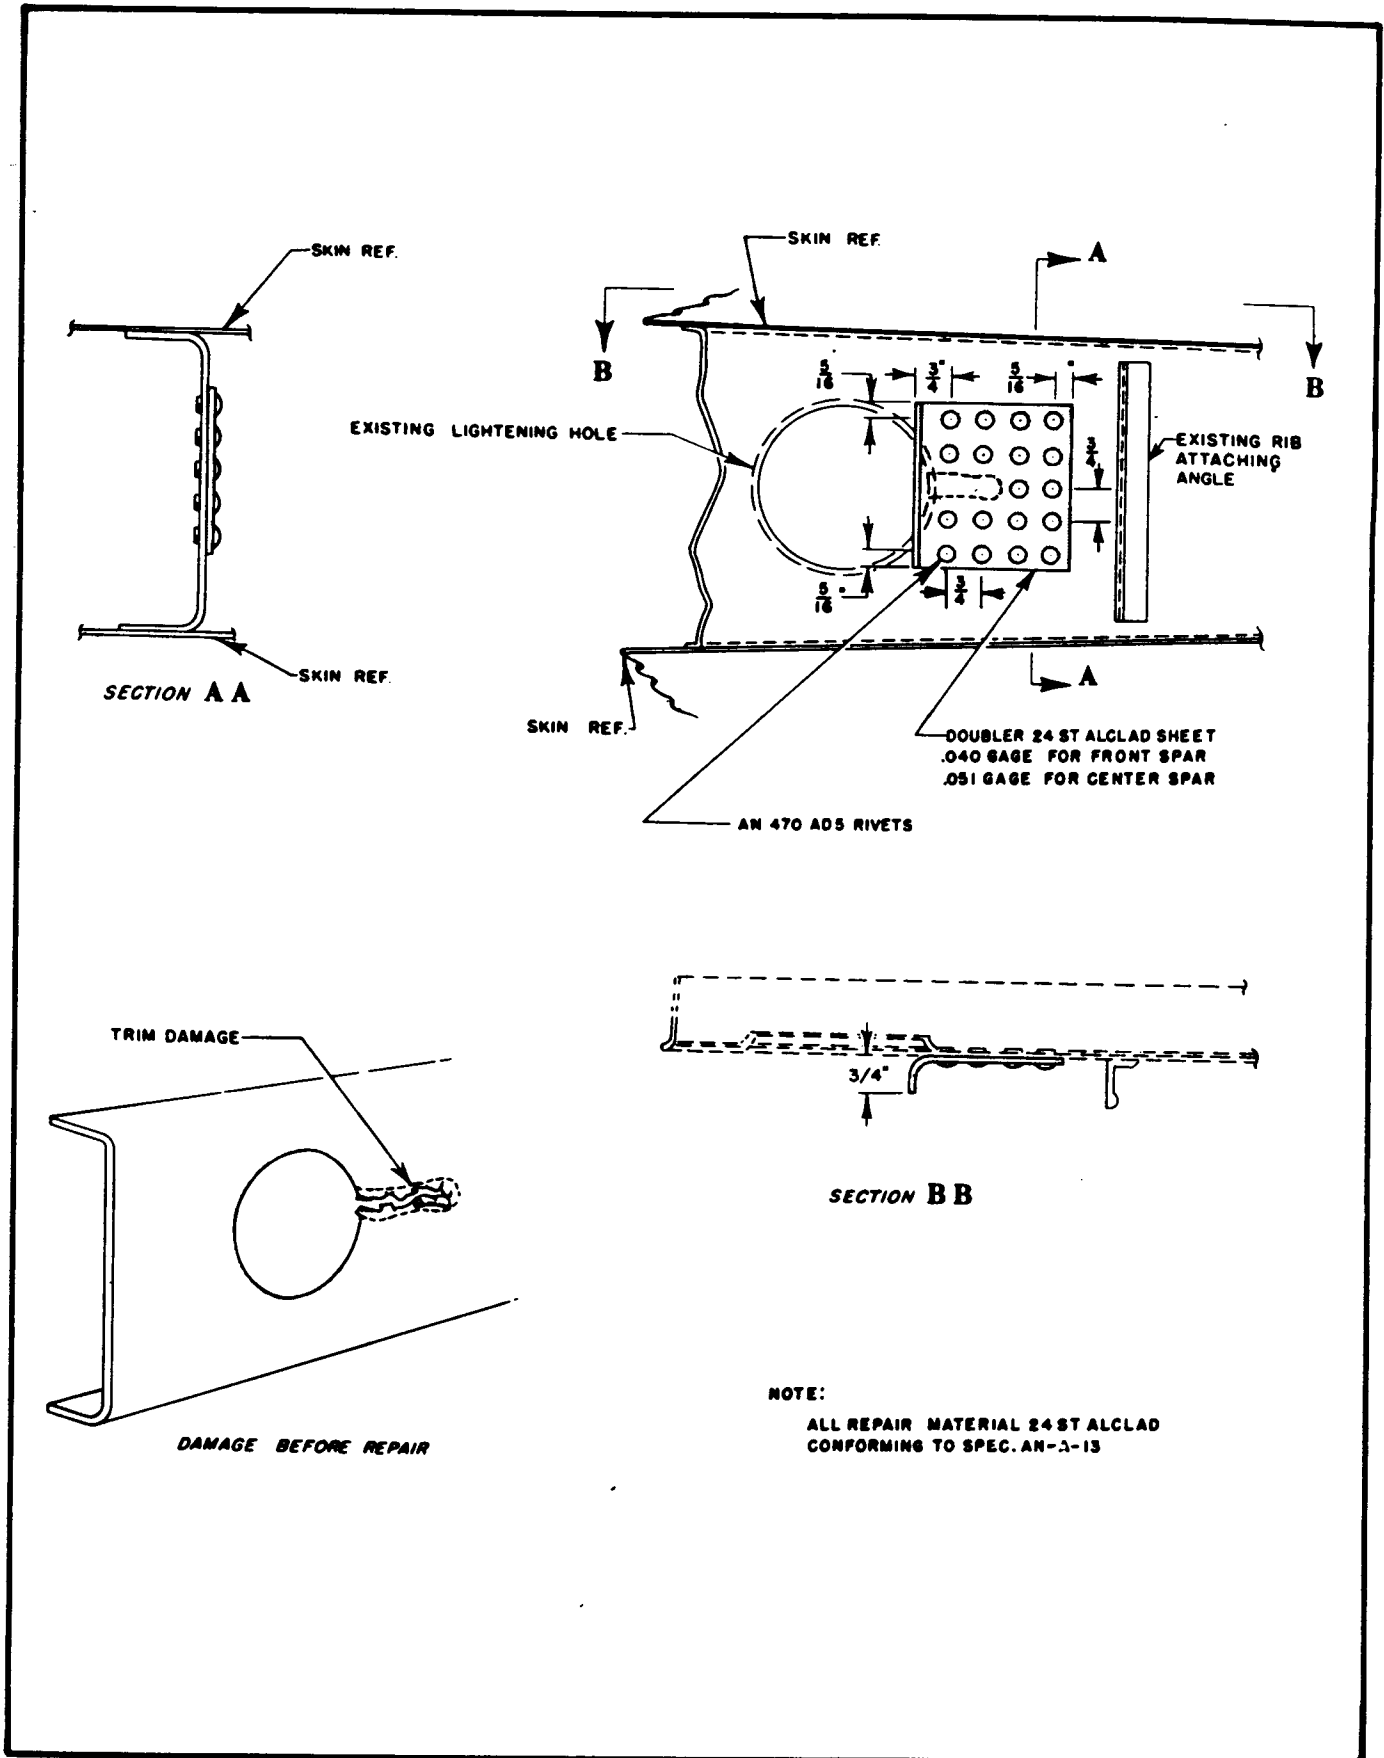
FRONT BEAM AND CENTER BEAM LIGHTNING HOLE REPAIR
